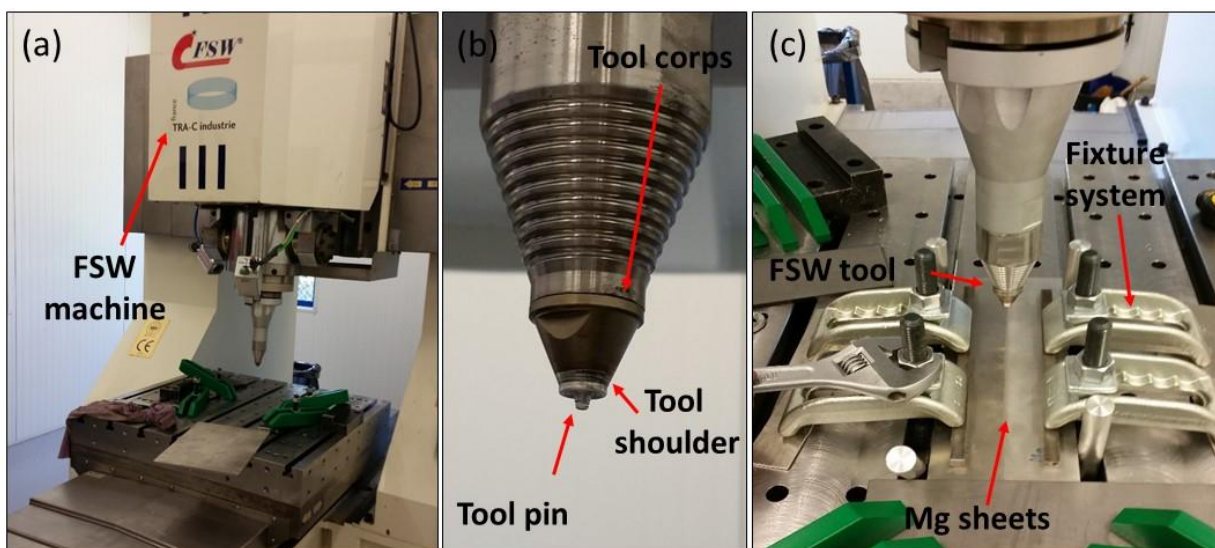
Friction stir welding equipment. (a) FSW machine, (b) FSW tool and (c) the clamping system.
